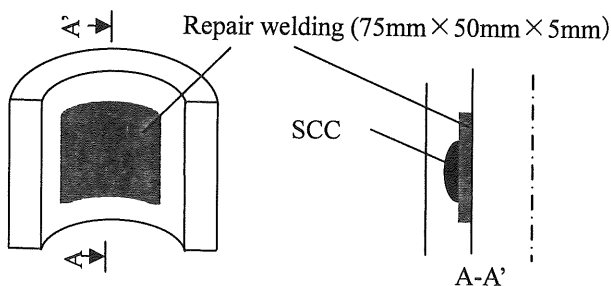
Schematic drawing of specimens with SCC Under repair welding
